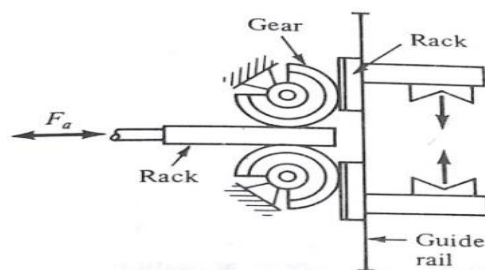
Gear –Cam – Rack method of actuating the grippers
